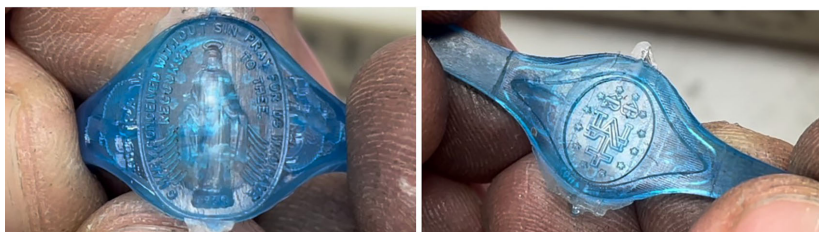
Plastic injected ring from the mold in Figure 71. This type of detail is difficult to achieve with a rubber mold. Rapid prototyping and casting directly can not give this fine of surface. Jewel Craft, Inc. Erlanger, Kentucky
